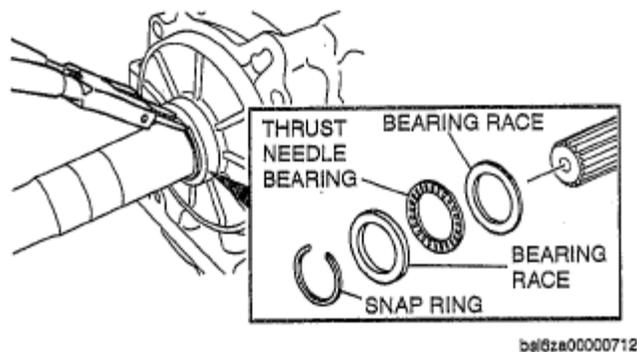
Installing Thrust Needle Bearing And Bearing Race
